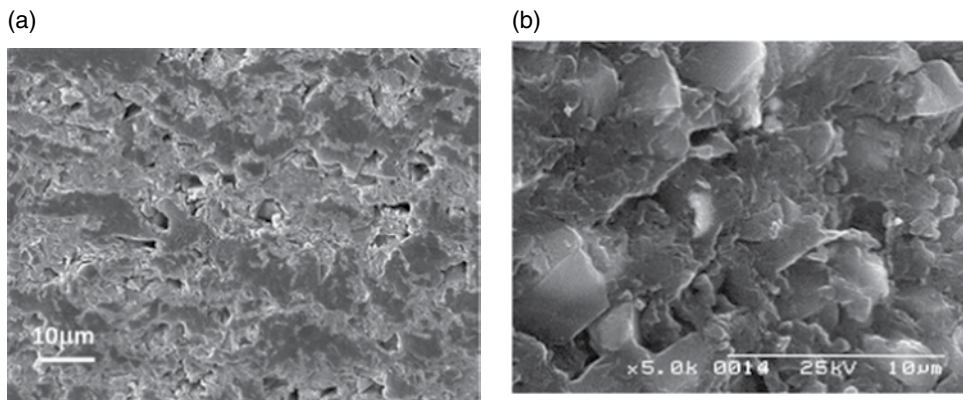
(a) Wheel surface after truing. (b) Wheel surface after appropriate dressing
